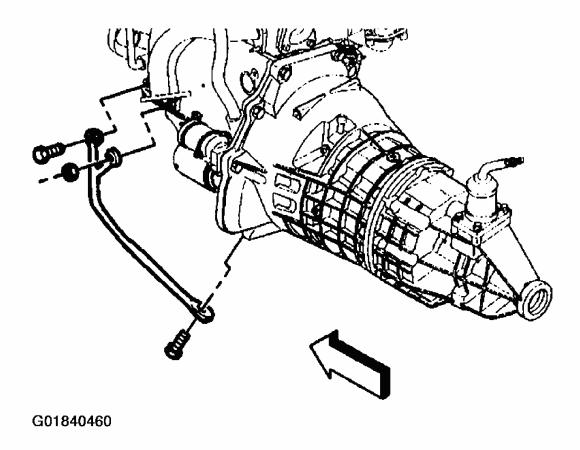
Installing Left Side Transmission-To-Engine Brace
